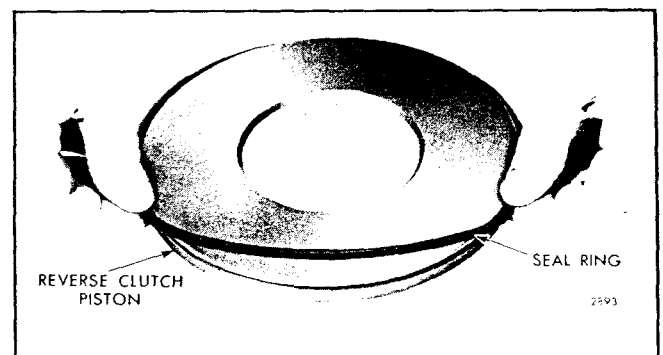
Installing Reverse Clutch Piston Seal Ring on Piston
